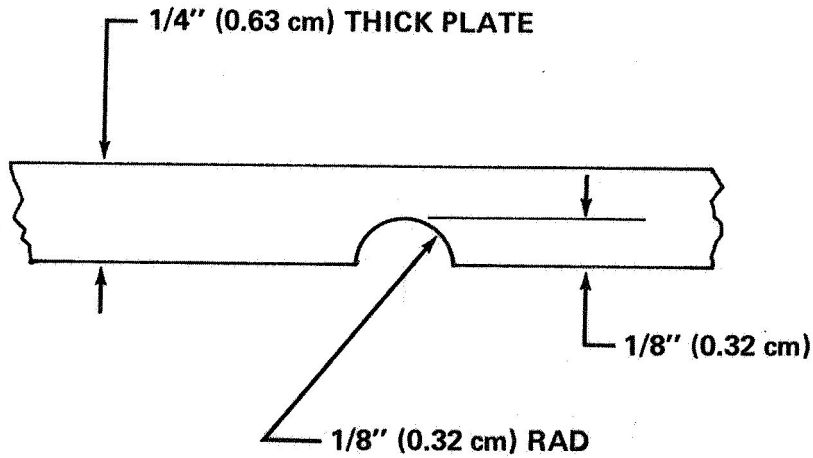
Repair groove configuration for 1/4-in. (0.63 cm) thick plate Inconel 718.
